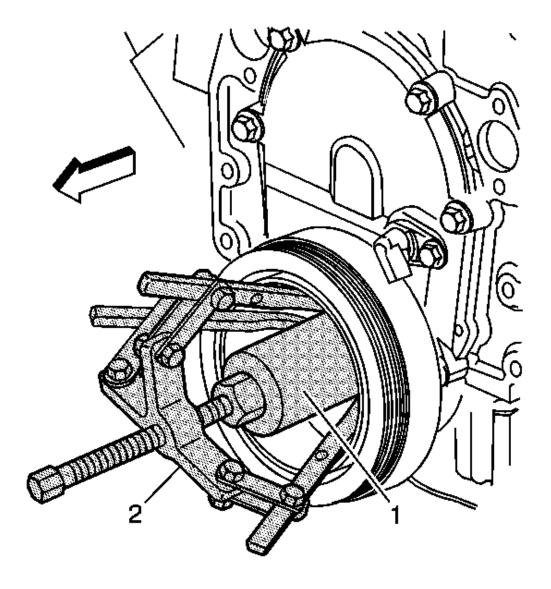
Installing J 42846 Onto End Of Crankshaft Courtesy of GENERAL MOTORS CORP.
